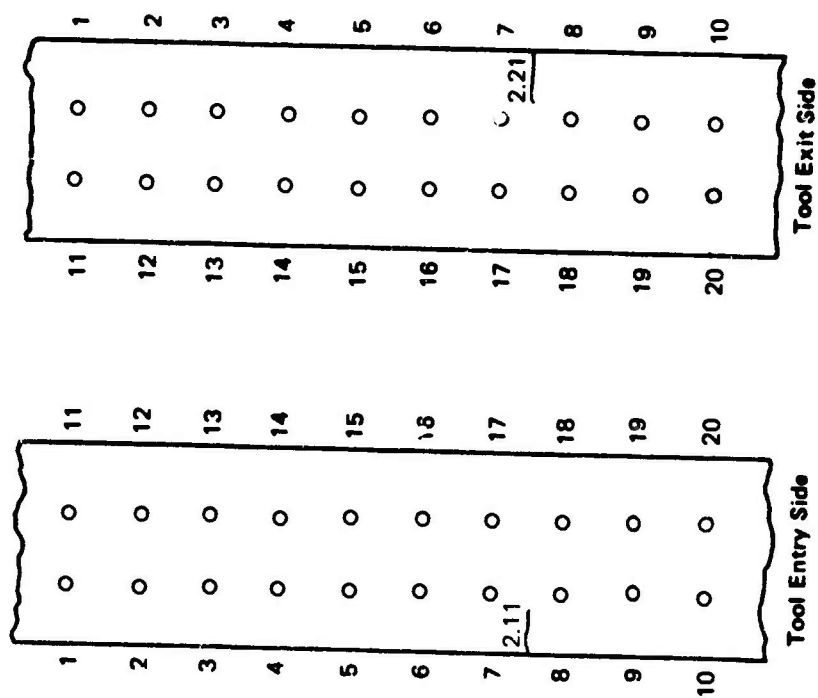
Fatigue Crack Initiation Sites in Usage Simulation Specimen No. 2A19 (Fig. 2, Load Transfer, Type II) Detected During Testing and After Disassembly
